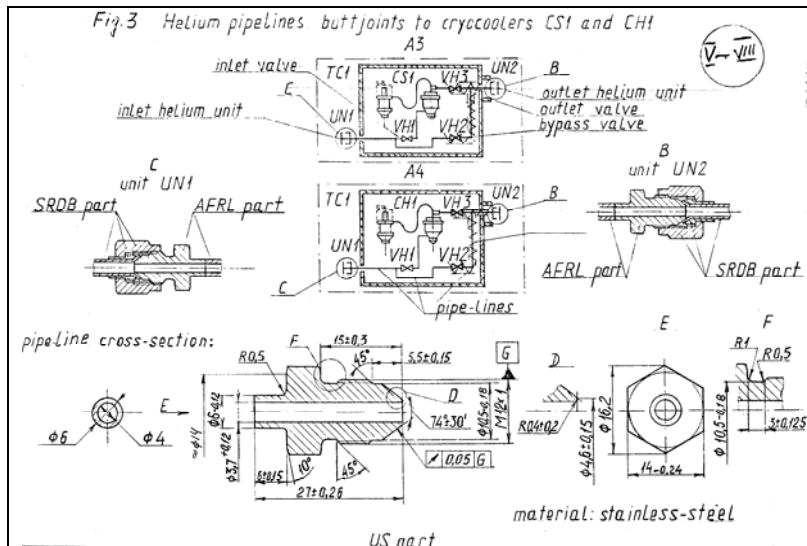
3. Helium pipelines buttjoints to cryocoolers CS1 and CH1
